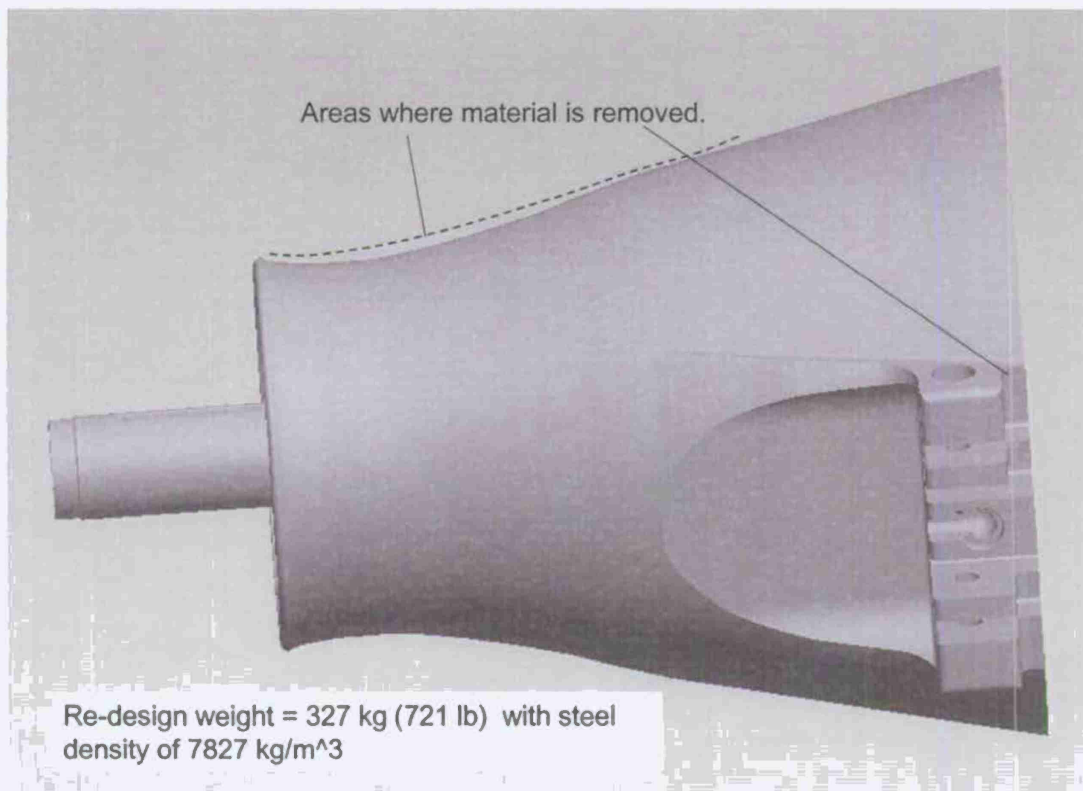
View of redesigned breech nozzle similar to Figure 6 showing where material is removed from outside of nozzle wall and surface and from recuperator supports to reduce weight and allow material to be added to the support vanes. Weight reduction is about 11%.
